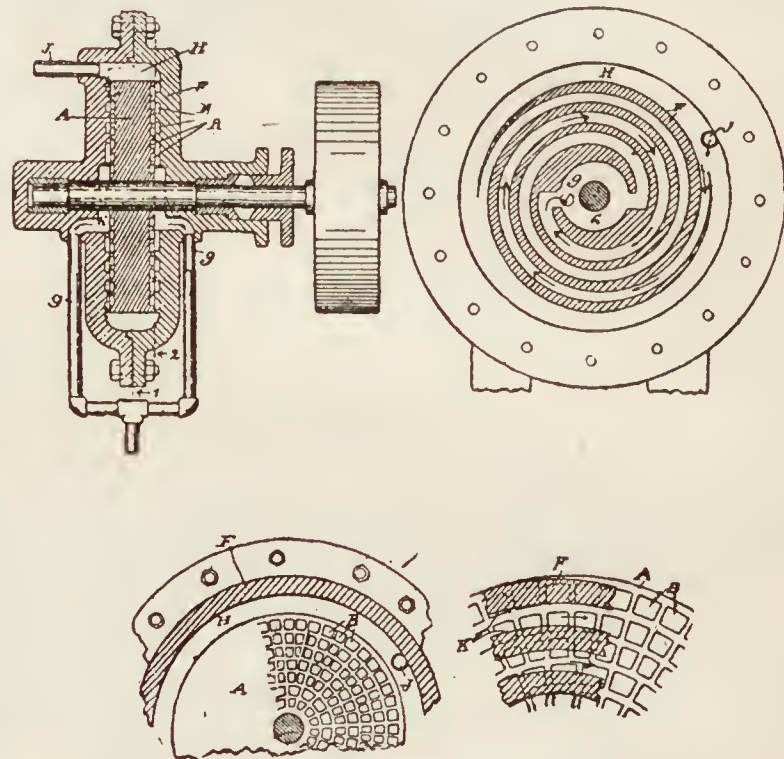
DETAILS OF THE M'ELROY TURBINE.
